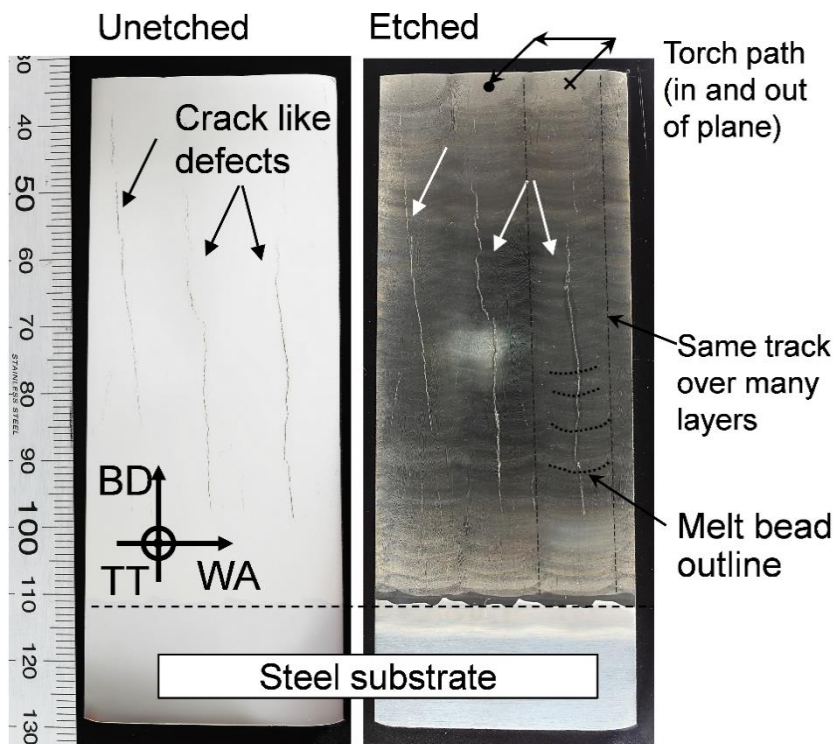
Metallographs of unetched and etched WAAM wall sections showing the length of the defects in the build direction.
